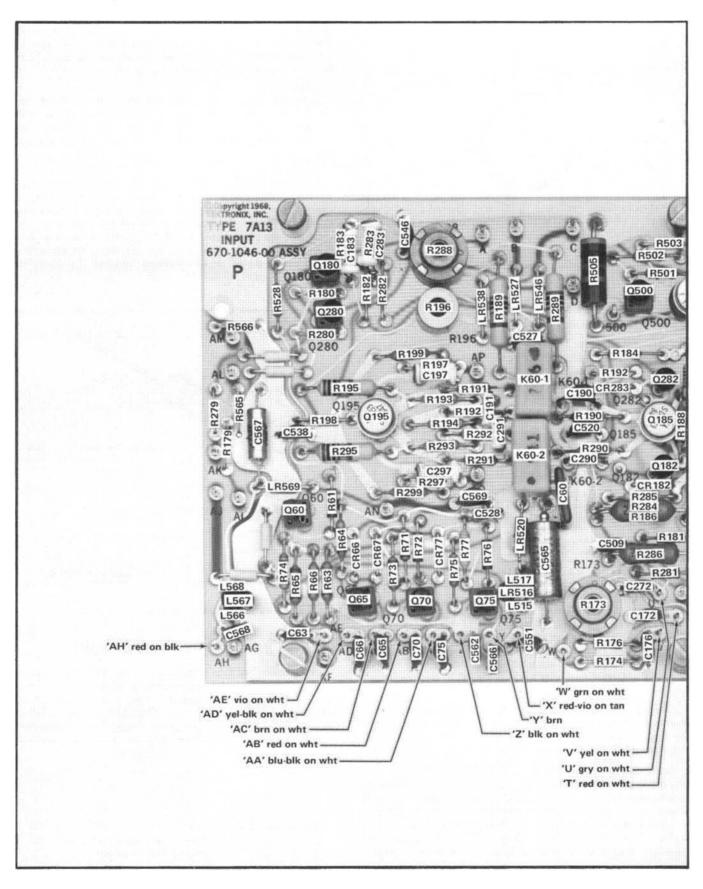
Partial Input Amplifier board showing component locations and wire color code.
